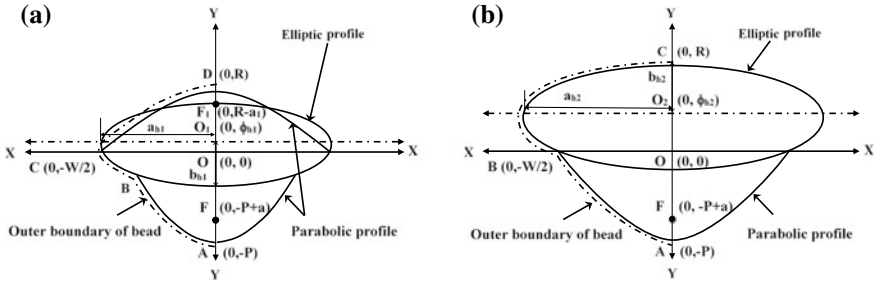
Segment-wise representation of weld bead of a AC Square and b DC power source
